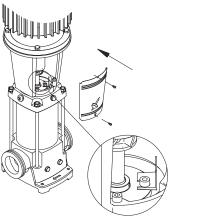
Adjusting fork storage CR, CRN 32, 45 and 64
